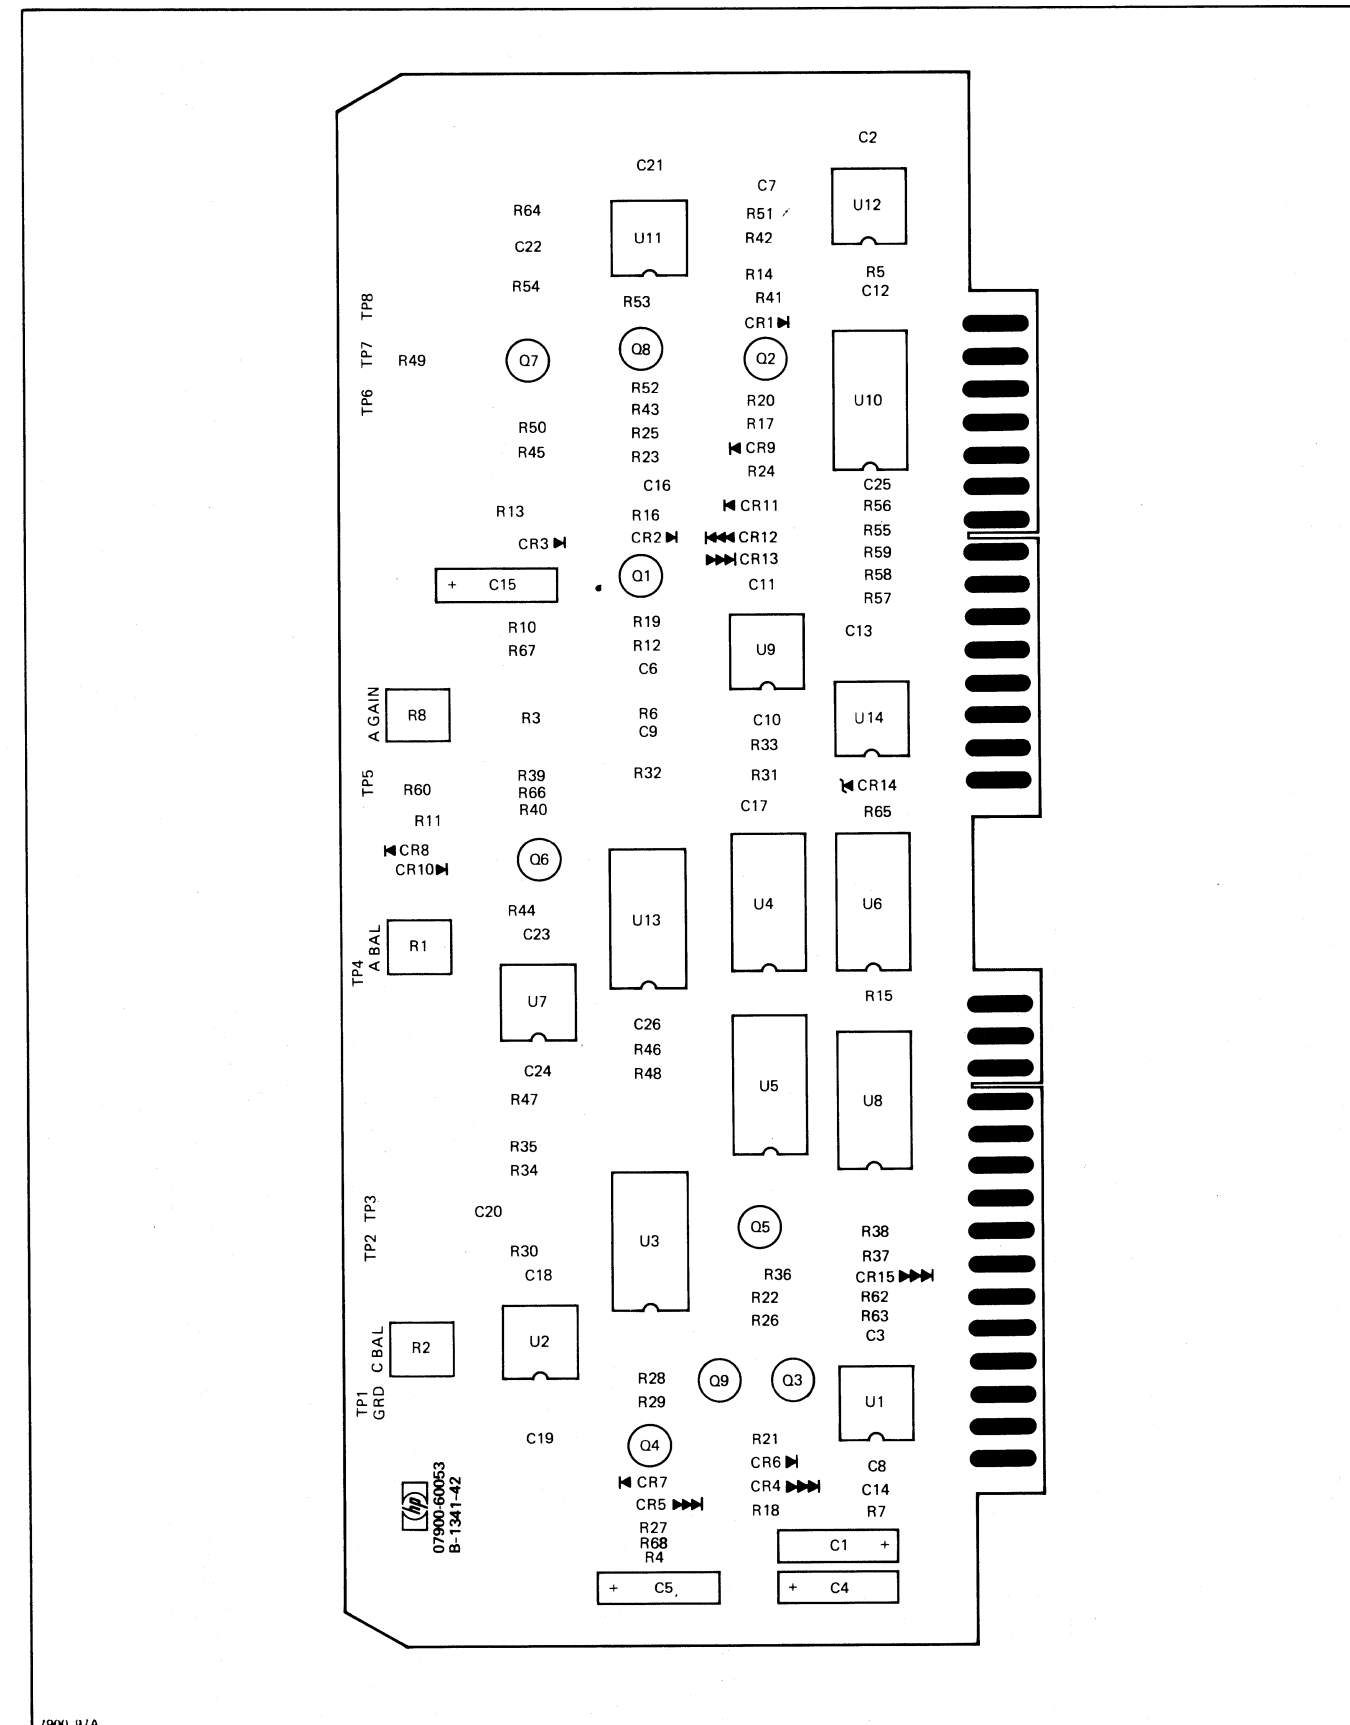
Encoder Assembly A12 Parts Location Diagram
